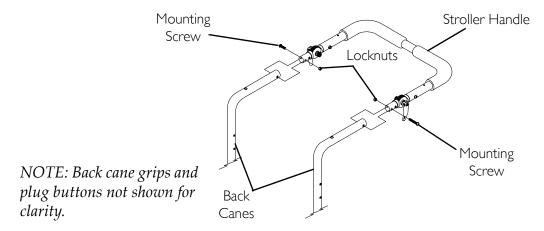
Installing Adjustable Angle Stroller Handles - Removing Adjustable Angle Stroller Handles
